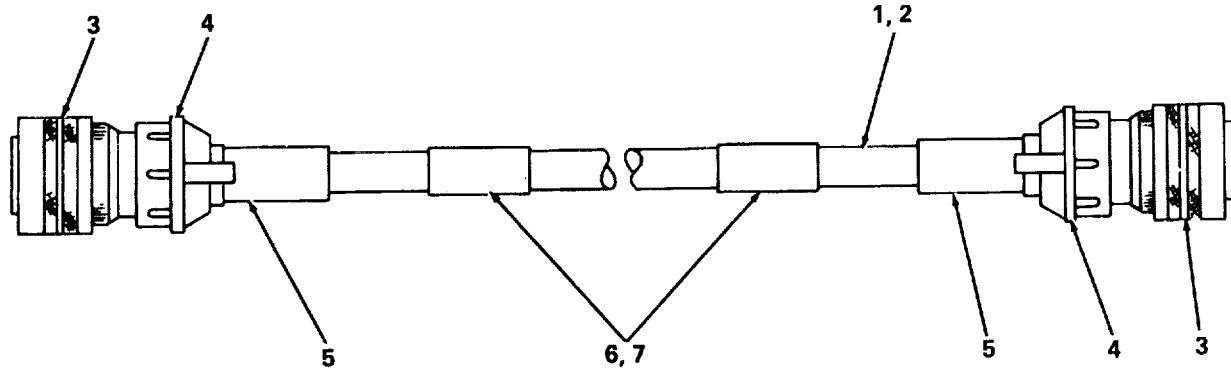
Cable Assemblies 1703-1-3131 (GR1-GR2)
